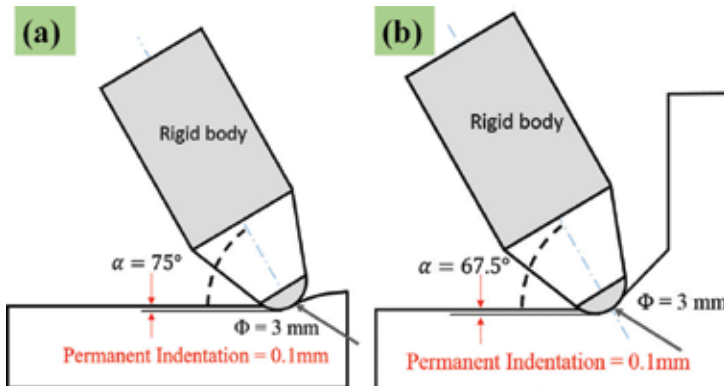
Pin tool position and indentation: (a) butt joint and (b) T-joint.
